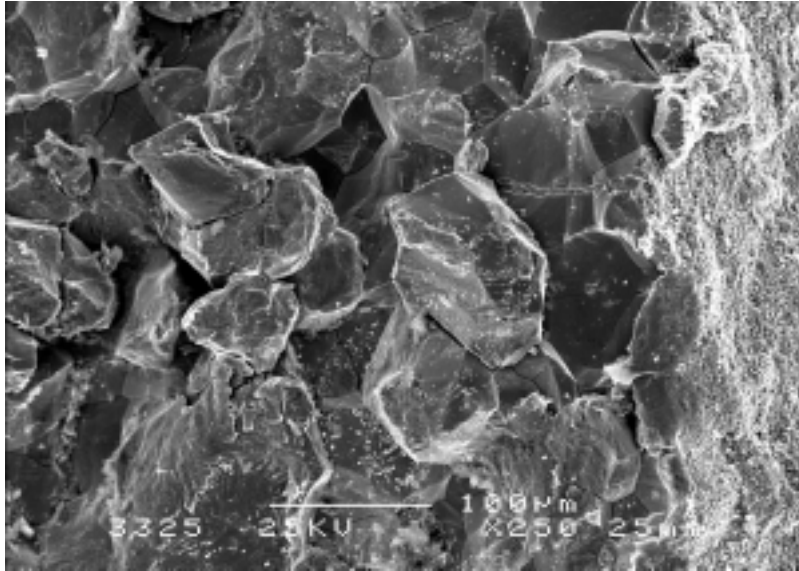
Intergranular fracture in cold worked AISI 316NG stainless steel.
